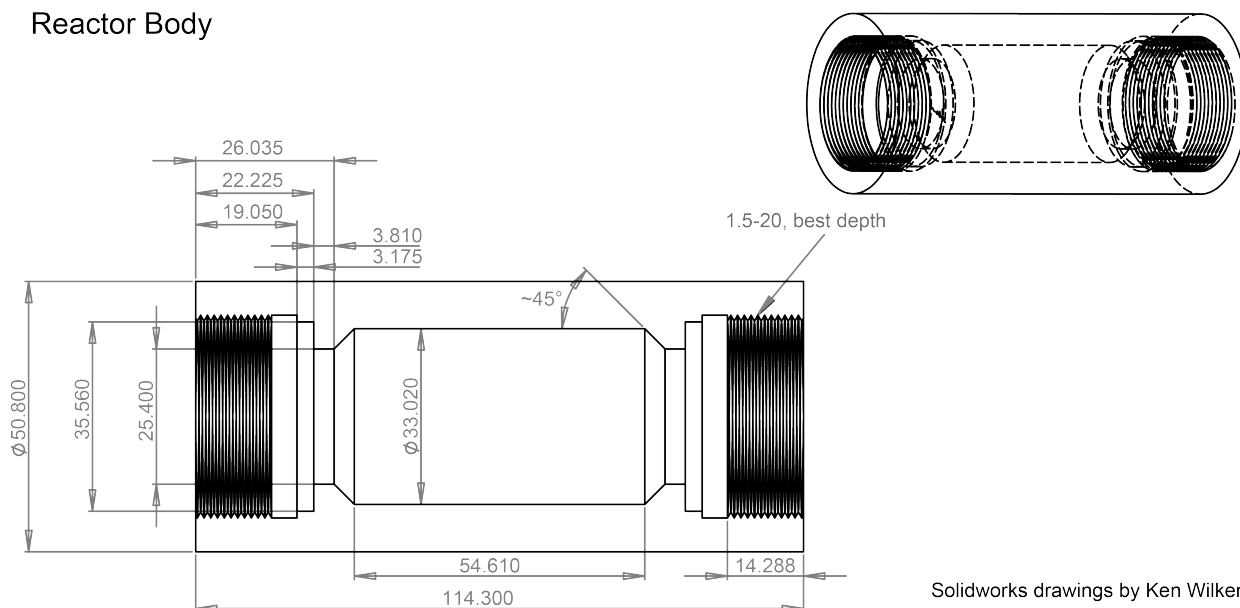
Drawings for the PHIP polarizer reactor body. Dimensions are mixed in mm and inches. Two O-rings (1 mm thick, 28 mm ID, made of BUNA material, P/N 9262K625 from McMaster-Carr) are placed inside this part for providing gas-tight seal, when connecting this part with reactor top and bottom caps (Figure S8 and Figure S9 respectively). This component is made from 2 in. OD stock of polysulfone rod.
